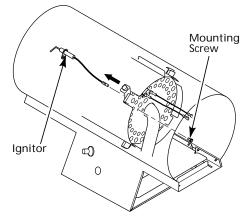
Removing Ignitor Mounting Screw and Ignitor
